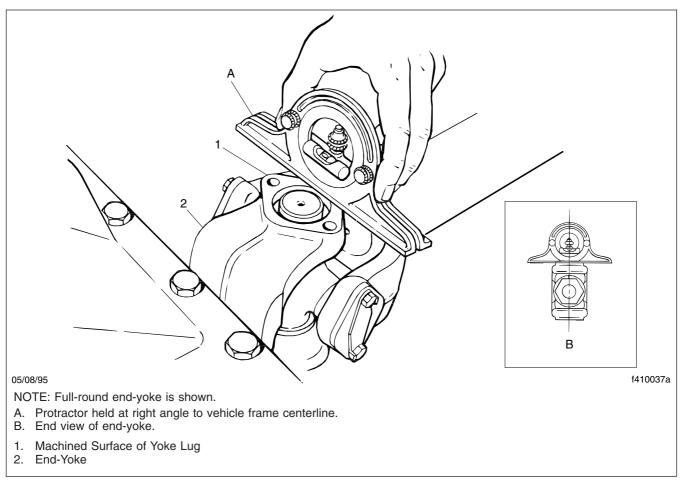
, Horizontal Positioning of Yoke Lug Machined Surface
